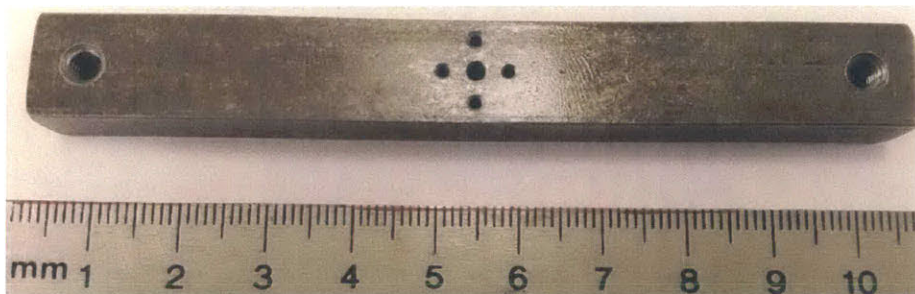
Rear steel bar clamp machined to be greater than the specimen width and threaded holes to receive screws from front transparent polycarbonate window. It acts as the rear external clamp and holds the membrane and housing against the
